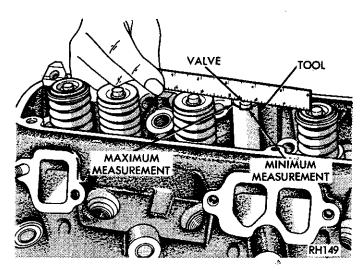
Measuring Valve Stem Length with Tool C-3968
